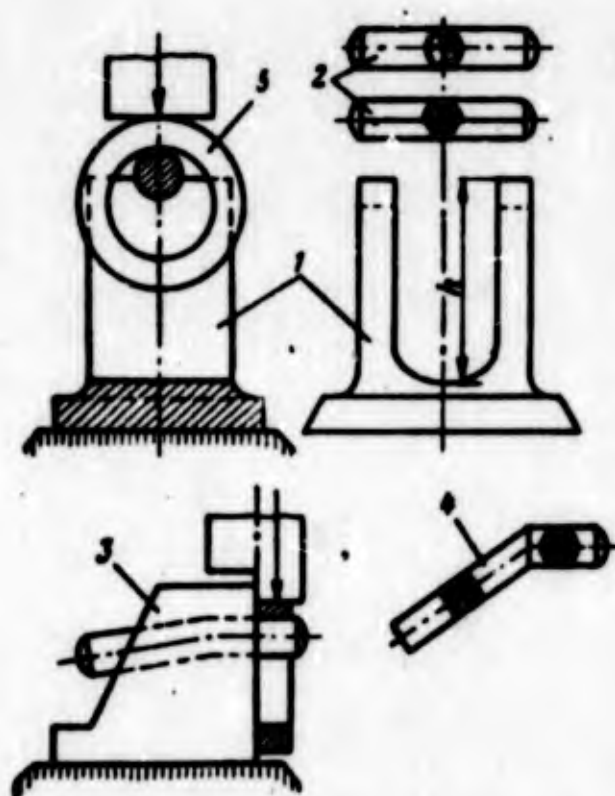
Diagram of attachment for rolling rings by flat-die forging. 1) stirrup; 2) shift holders with various profile of section; 3) horn anvil; 4) shift cantilever horn; 5) blank to be rolled
